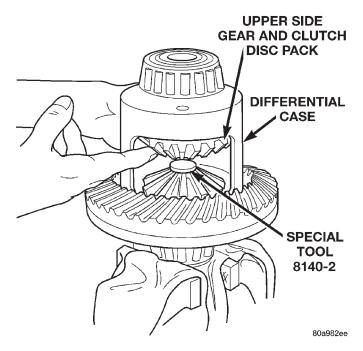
Upper Side Gear & Clutch Disc Pack Installation
